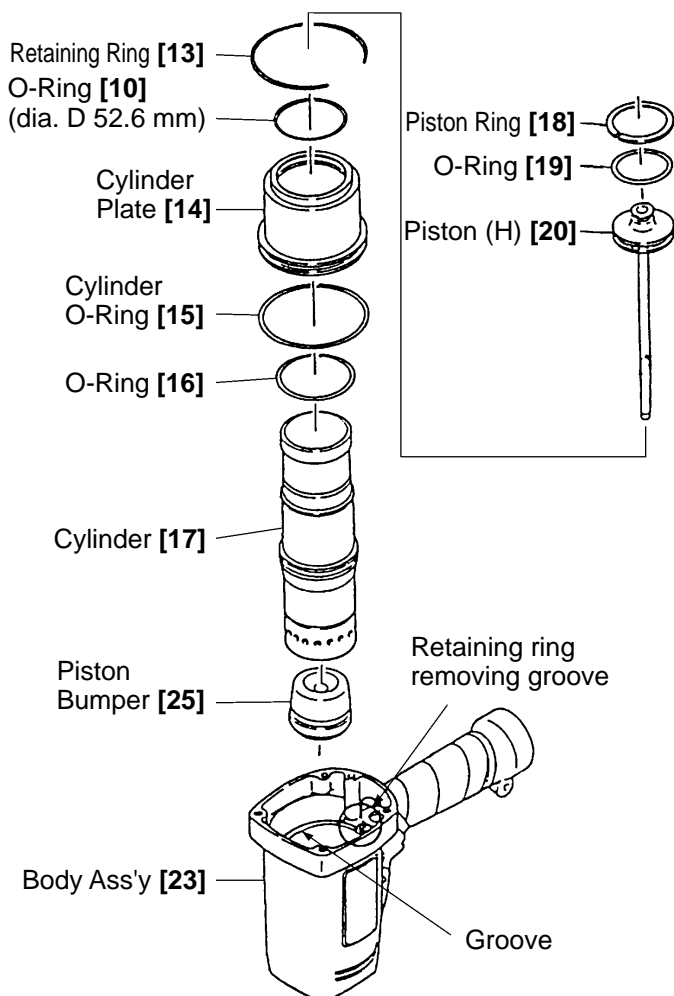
Disassembly and reassembly of the cylinder, piston, etc.
